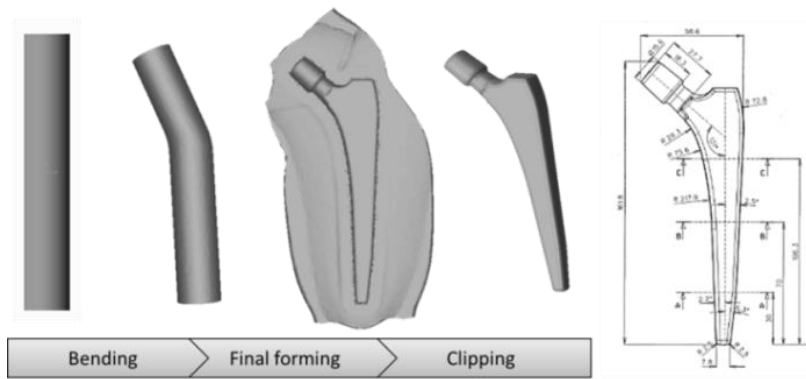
Left: conventional forging sequence; Right: technical drawing of the hip implant
